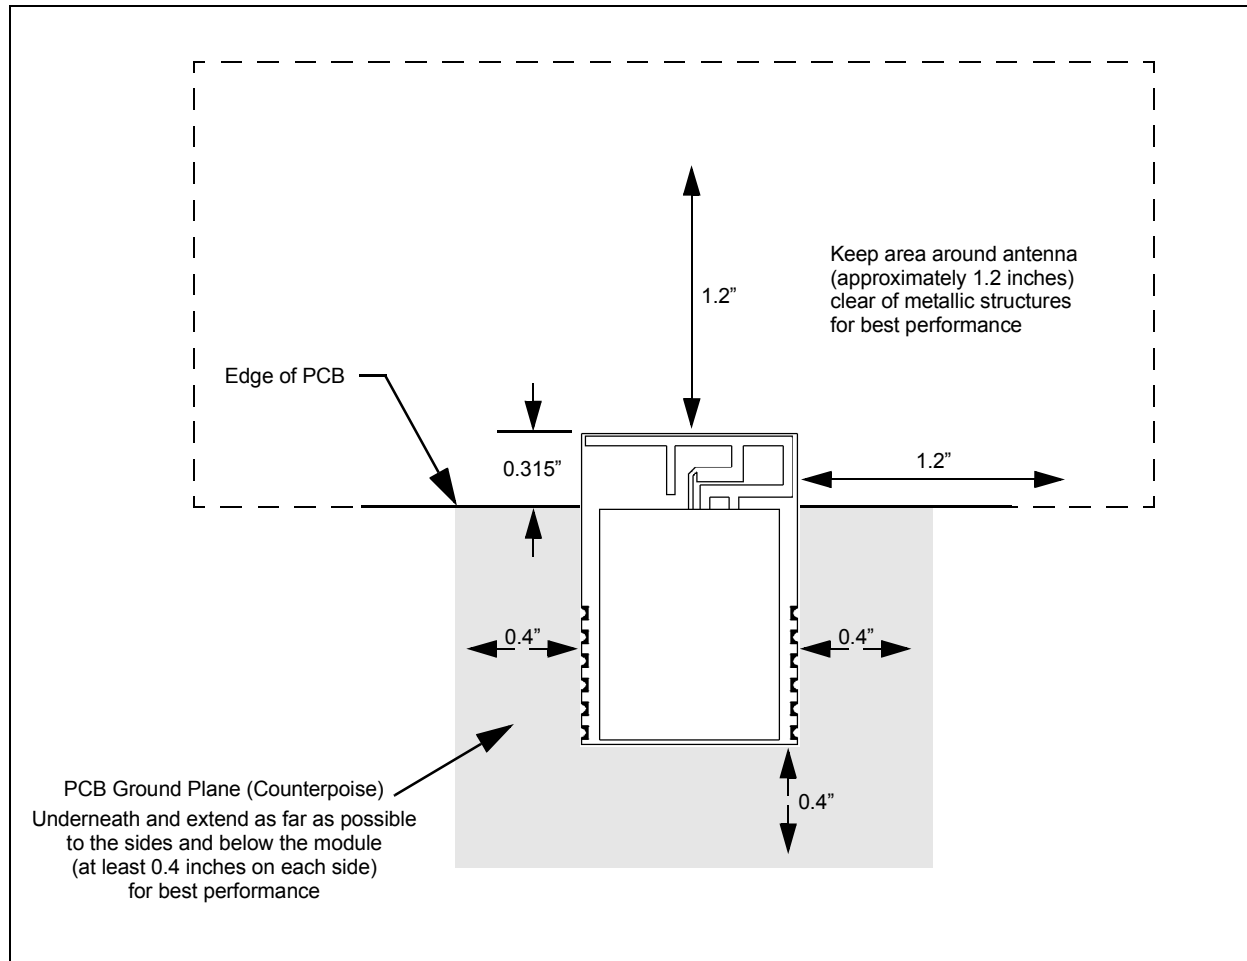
RECOMMENDED PCB FOOTPRINT
